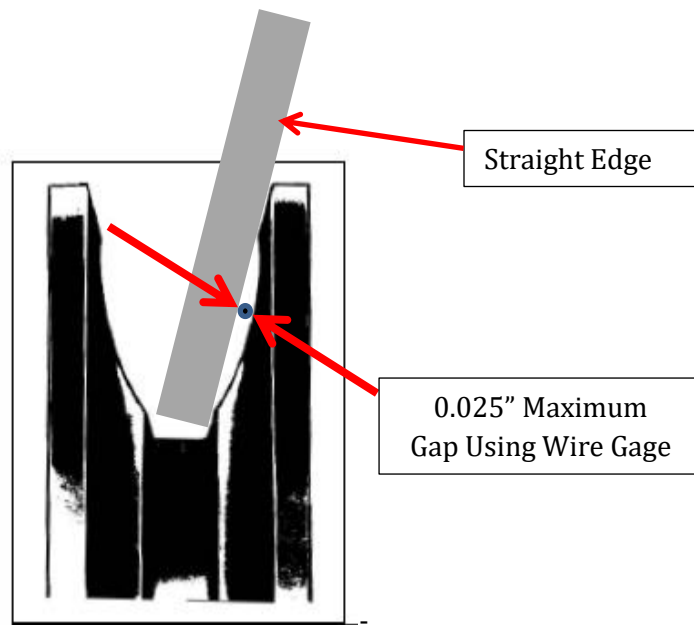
DISHED OUT PULLEY GROOVE EXAMPLE
